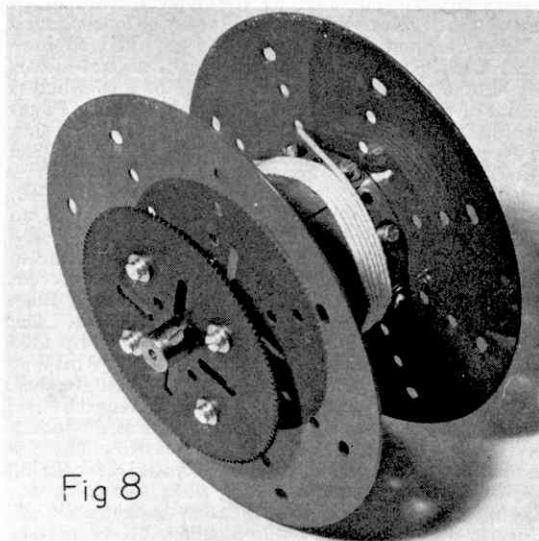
A "deep-throated" winding drum for a colliery winding engine or large model dragline. The driving gear is bolted directly to the drum for rugged drive.
